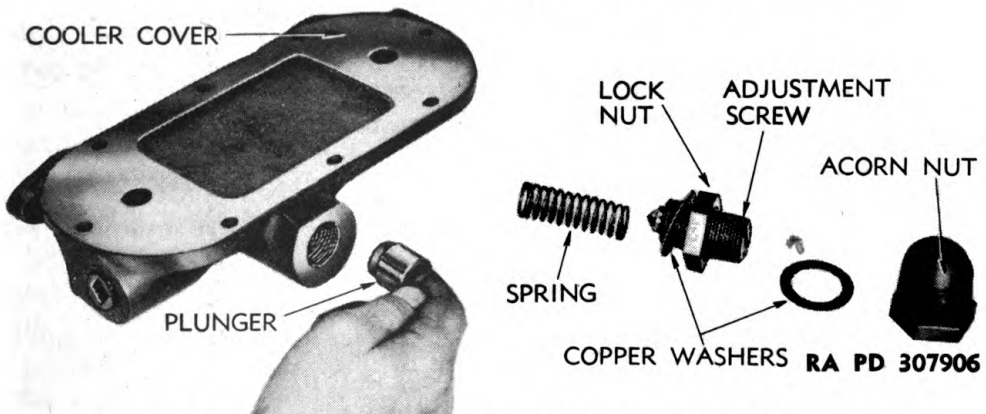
Oil Cooler Pressure Relief Valve Removal
